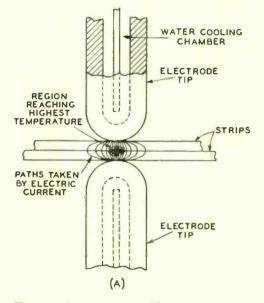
In a spot weld the heating is localized over a very small area
